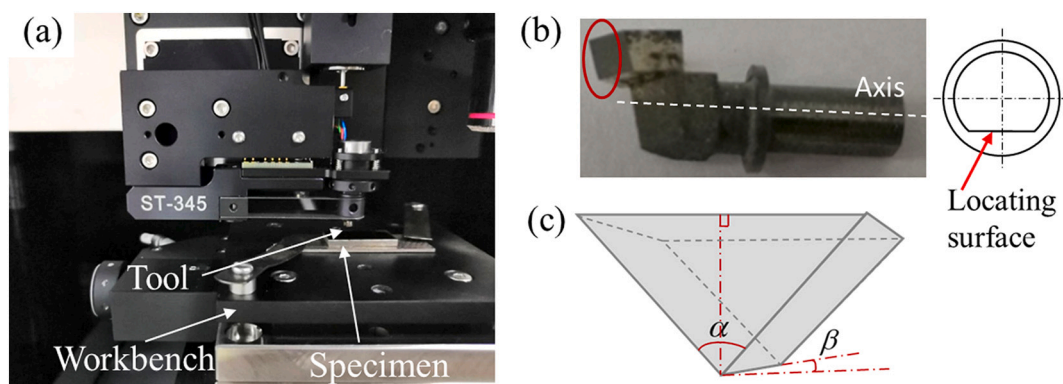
(a) Nanoscratch tester (b) the V-shaped cutting tool (c) sketch of the tool.
